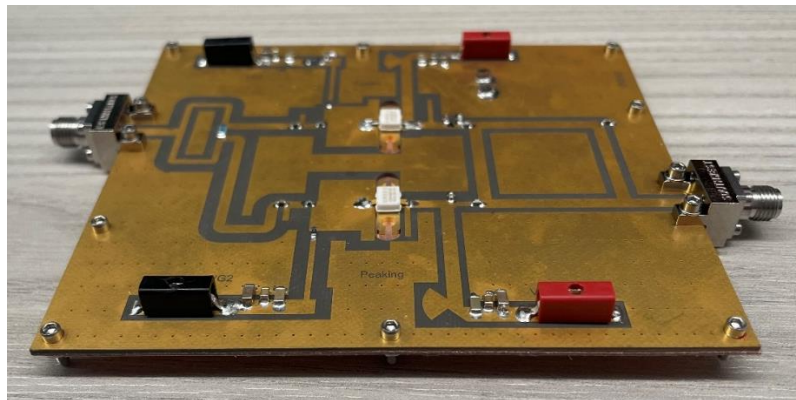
Photograph of DPA Assembly, Side-Profile – Unit 1.
